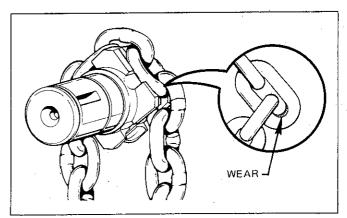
Check Chain Wear at Bearing Surfaces Between Links.
